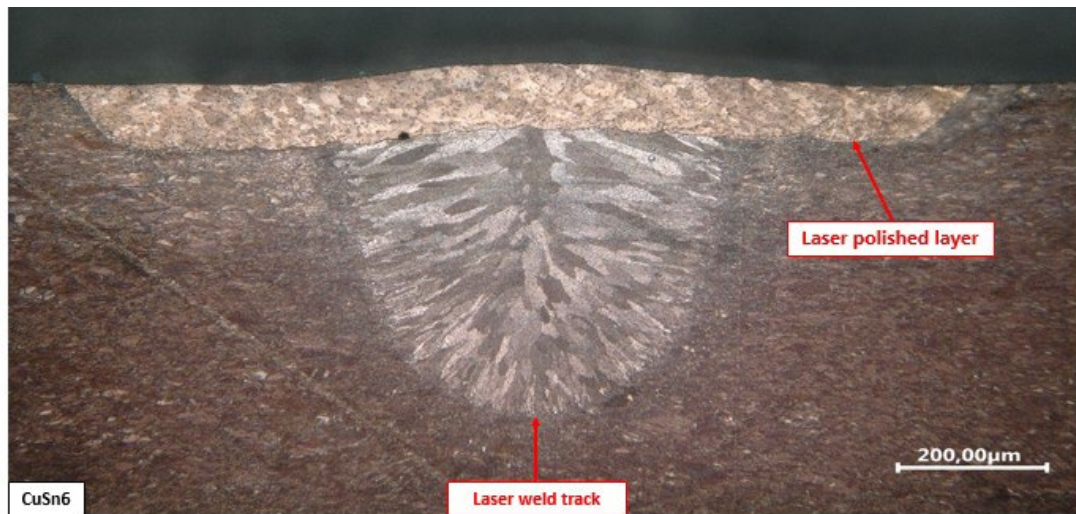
Microscopic image of etched metallographic cross section of laser polished laser micro weld seam on CuSn6 using best parameters identified. The separate laser polishing tracks are clearly visible as well as the laser weld track which shows very strong contrast with large oriented crystal structure. The residual bulge of the weld track is also visible. Cracks or pores are not obvious in this sample.
